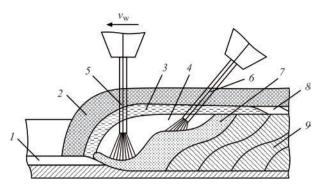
Scheme of two-wire submerged-arc welding with application of modified master alloy [31]: *1* — master alloy; *2* — flux; *3* — liquid slag; *4* — gas bubble; *5*, *6* — electrode wires; *7* — liquid pool; *8* — solidified slag; *9* — weld metal
